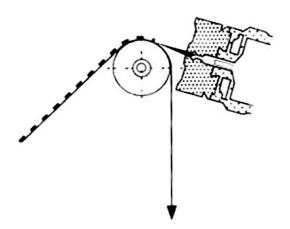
Scheme of fabric singeing machine with flame tangential to fabric
